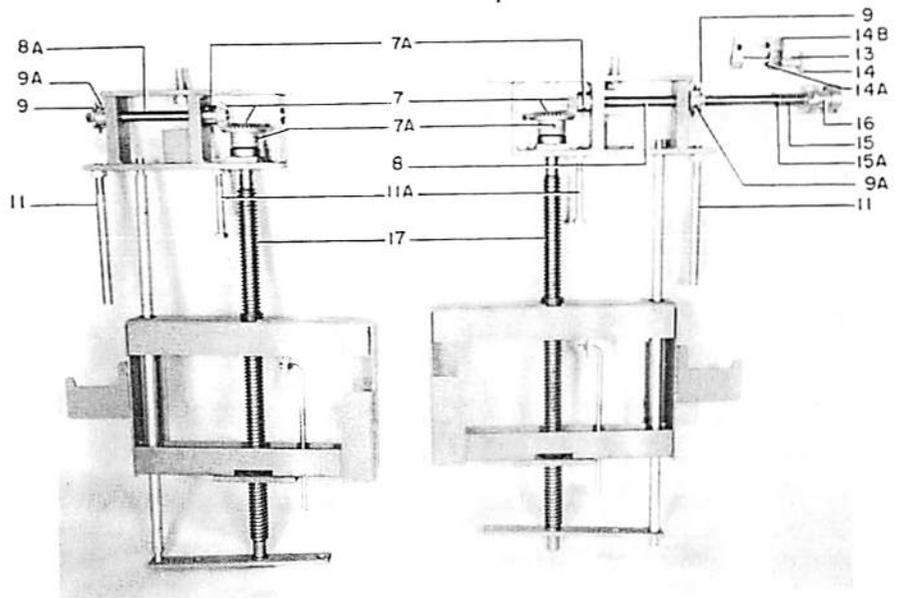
A View Showing Elevating Mechanism Motor and Control Unit
